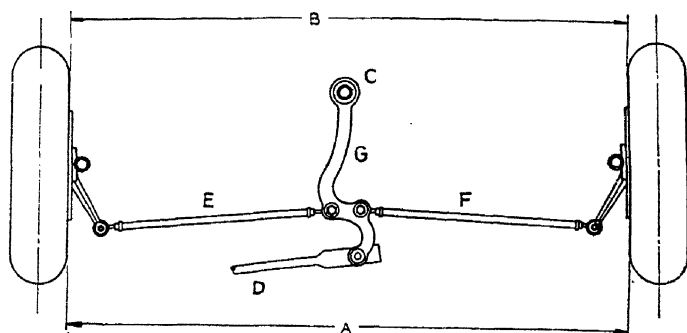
Positive Steering as used for Independently Sprung Front Wheels.
